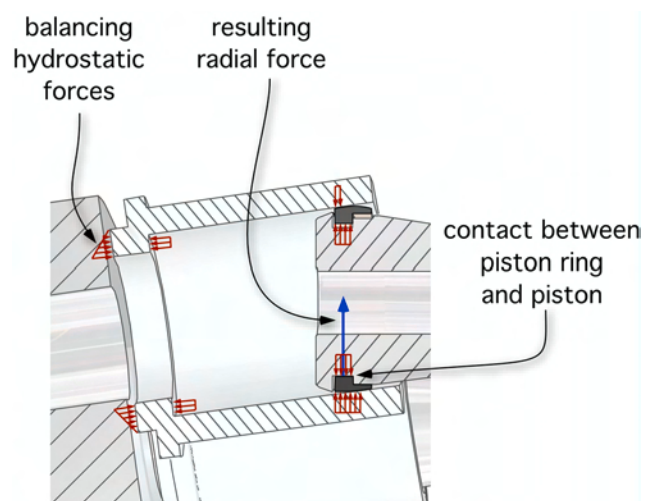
Detailed cross section of floating cylinder cups, fixed pistons and balanced piston rings.
